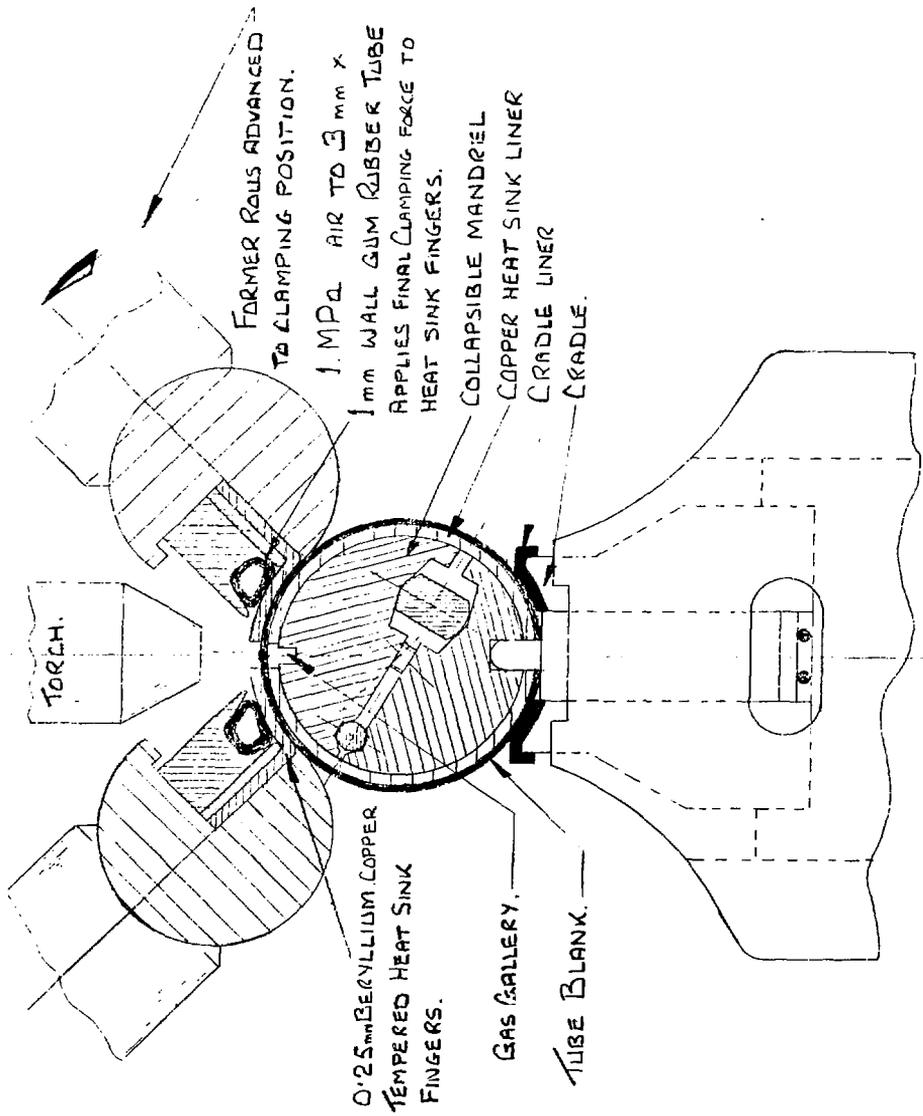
CROSS SECTION OF FINAL ROLLING AND WELDING MACHINE
